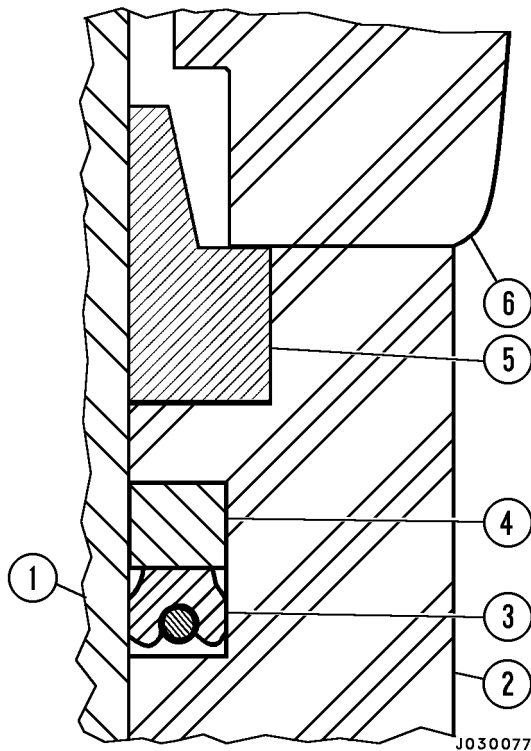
VALVE BODY SEAL INSTALLATION
